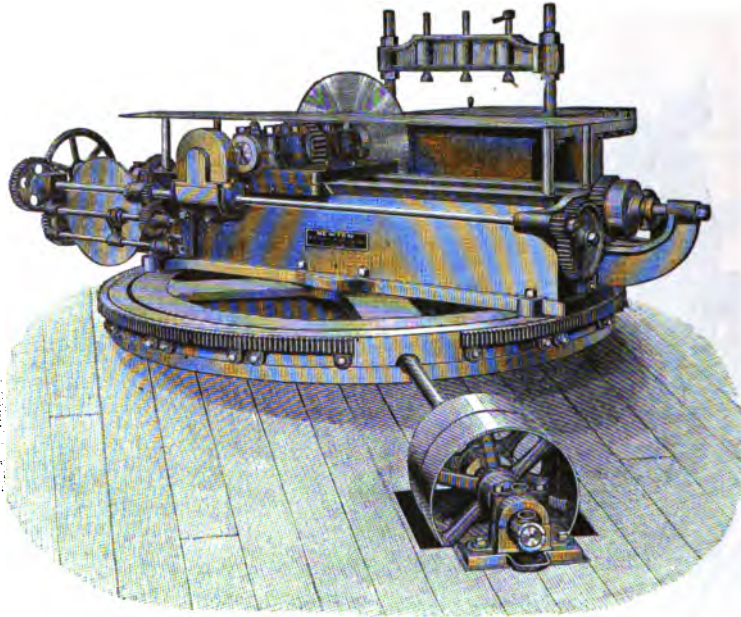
Cold saw cutting-off machine built on revolving bed.
